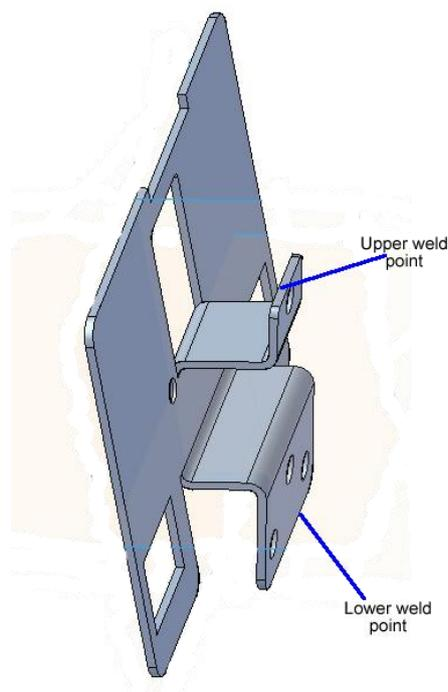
Welding the Terminal 155i bracket to a pipe
